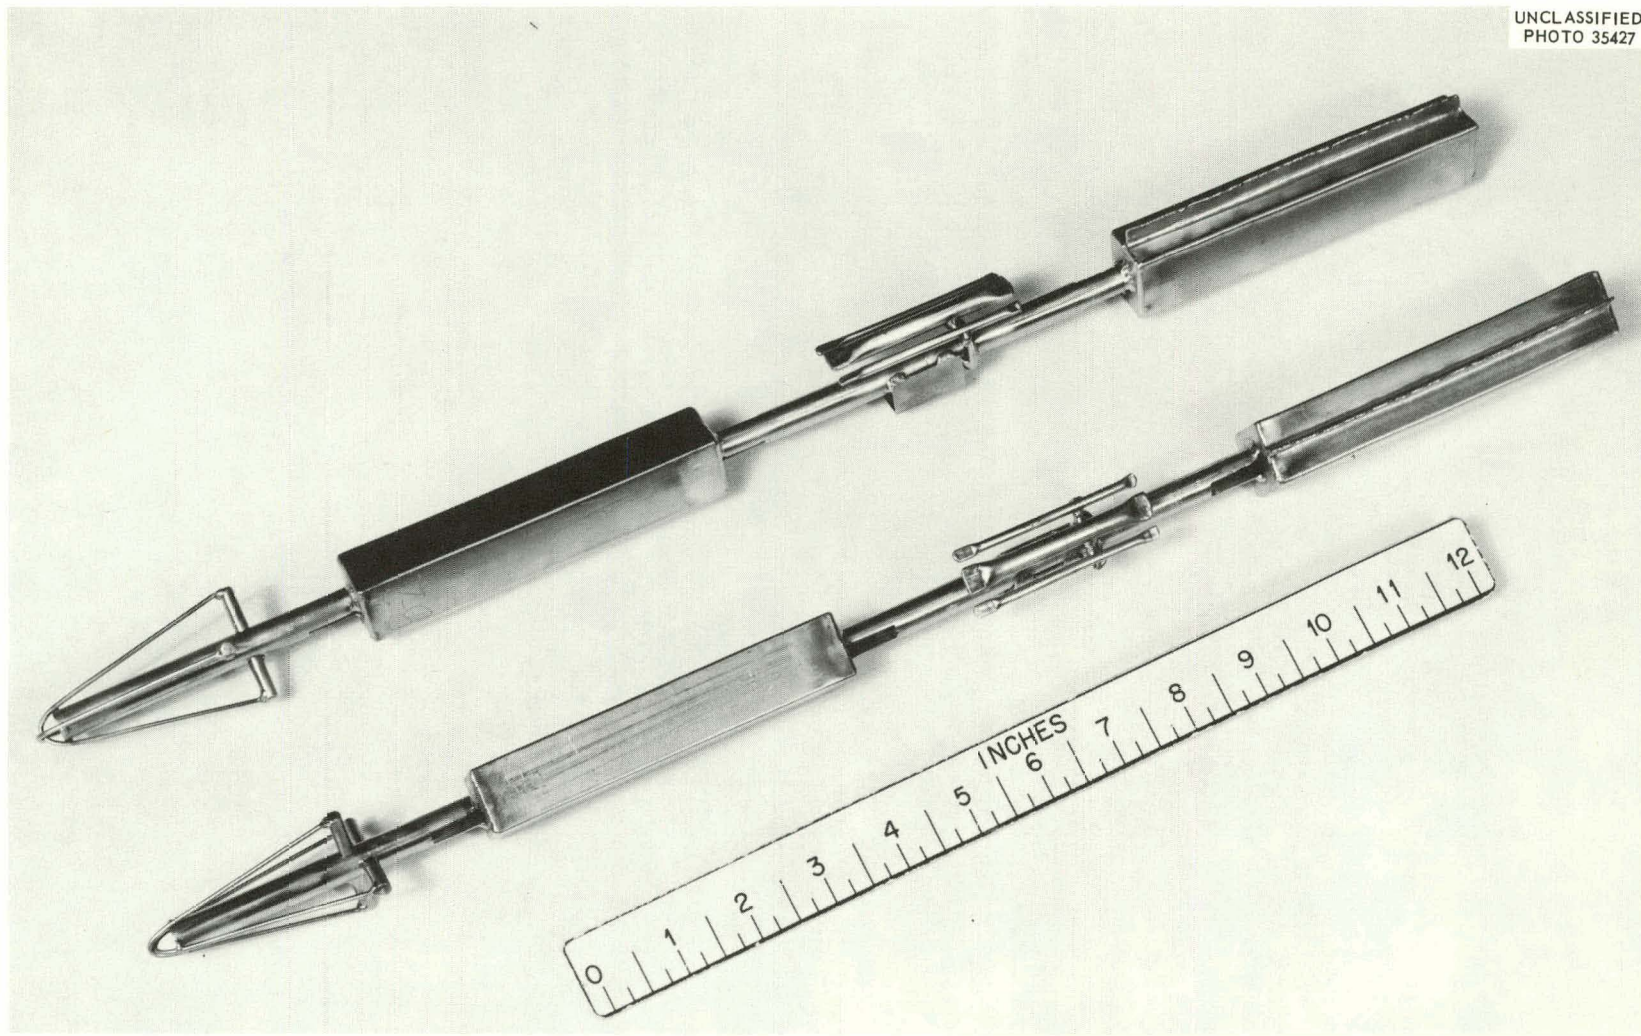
As-Fabricated Charpy Impact Specimen Irradiation Assemblies.
